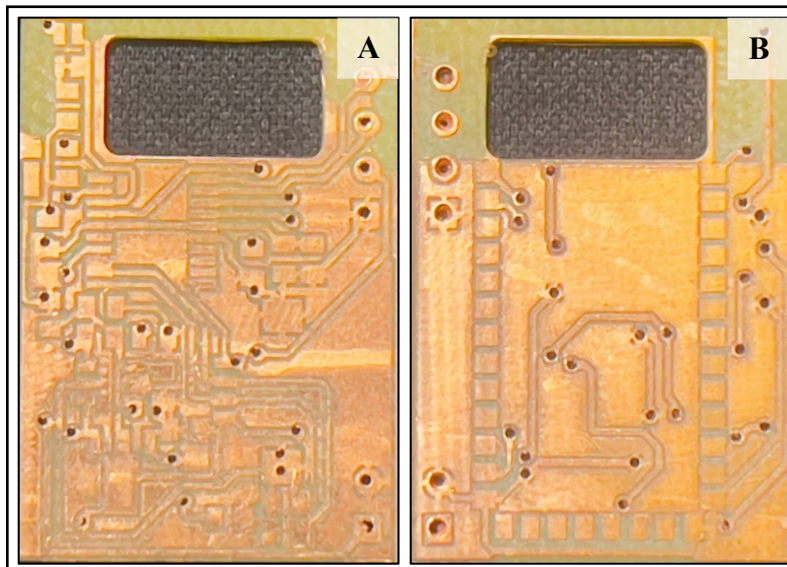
Initial PCB fabrication: (A) front, (B) back
